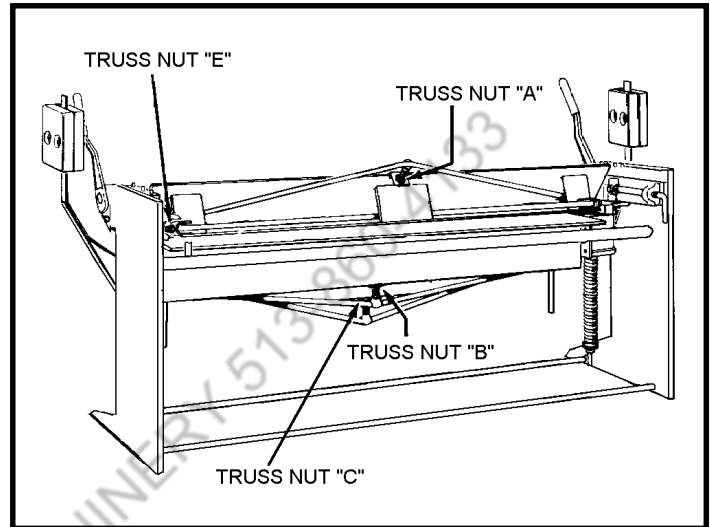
Rear View of Brake Showing Tension Adjustment Points
